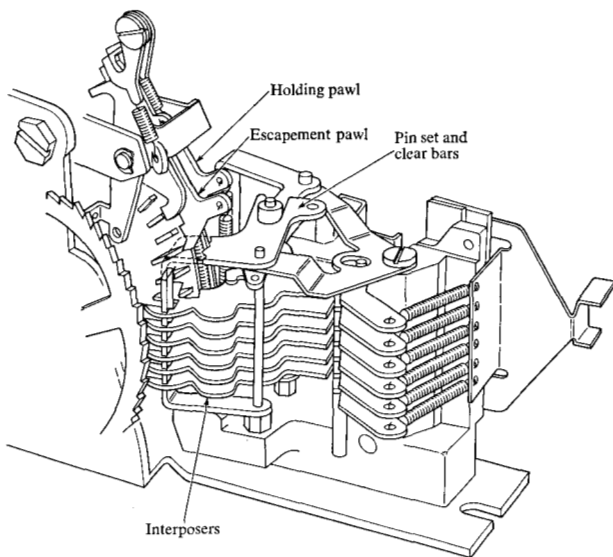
Sketch showing escapement and holding paws, pin set and clear bars, and pin selection interposers.
